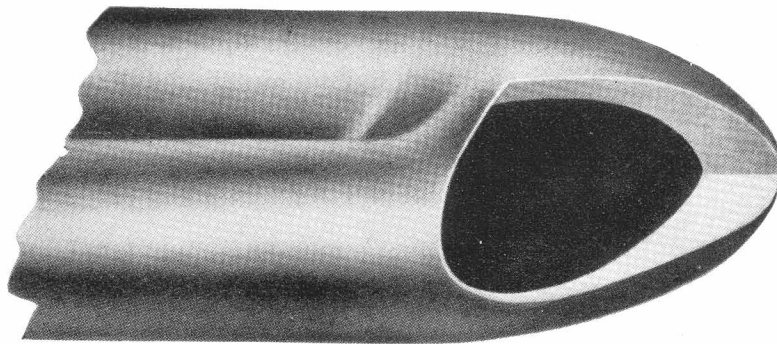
Sectioned View of MeLeSco Forged Return Bend.
